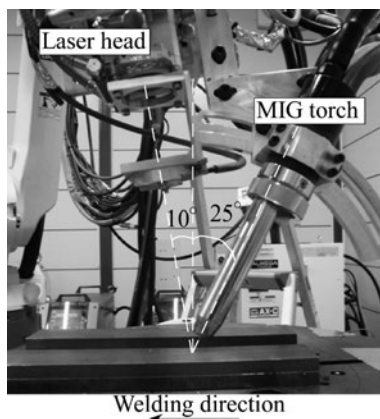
Setup of 10 kW fiber laser head and MIG arc torch for hybrid welding.
